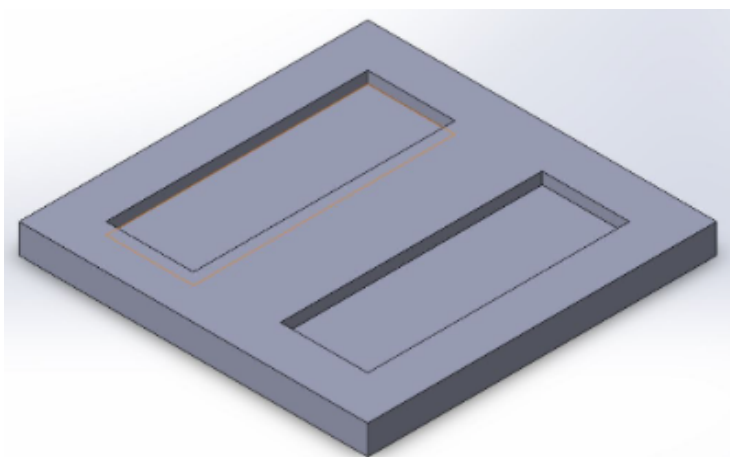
shows the mold which creates 2 aerogel blanket strips.
